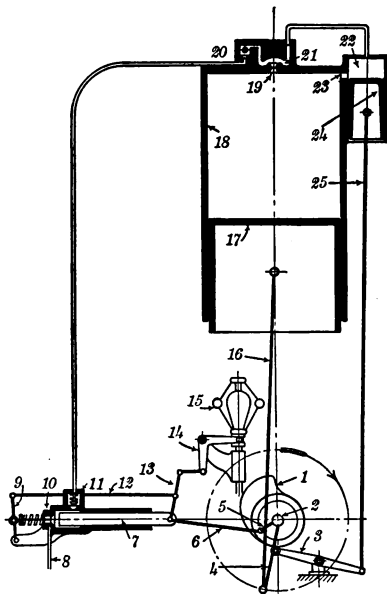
OPEN NOZZLE WITH AUXILIARY INJECTION-AIR PISTON
